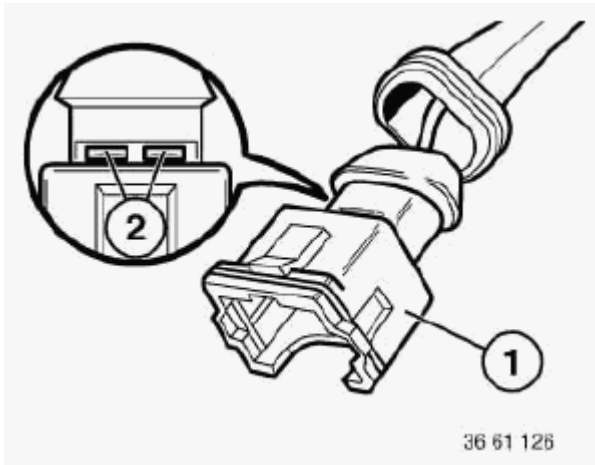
Identifying Ultrasonic-Welded Connectors
